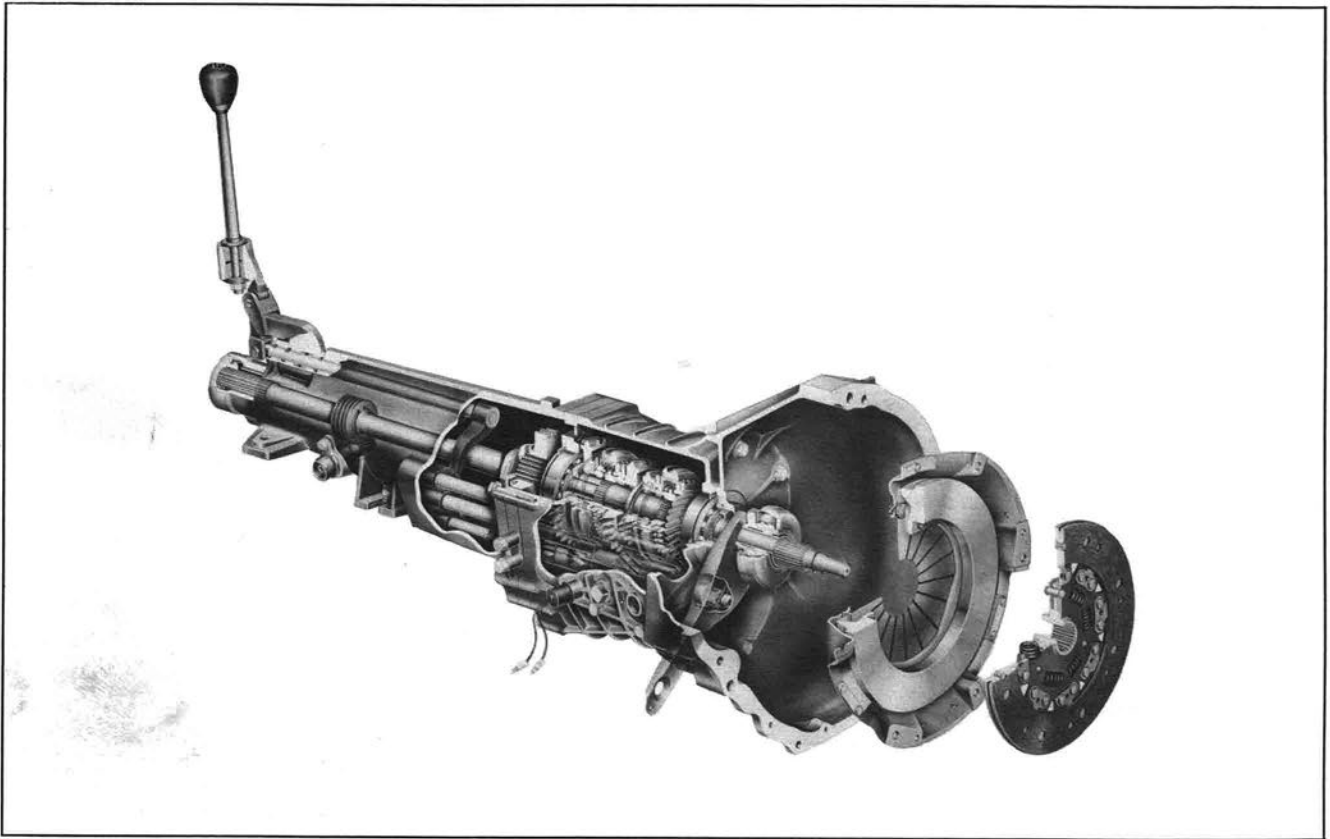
Clairvoyant view of type F4W71A transmission
